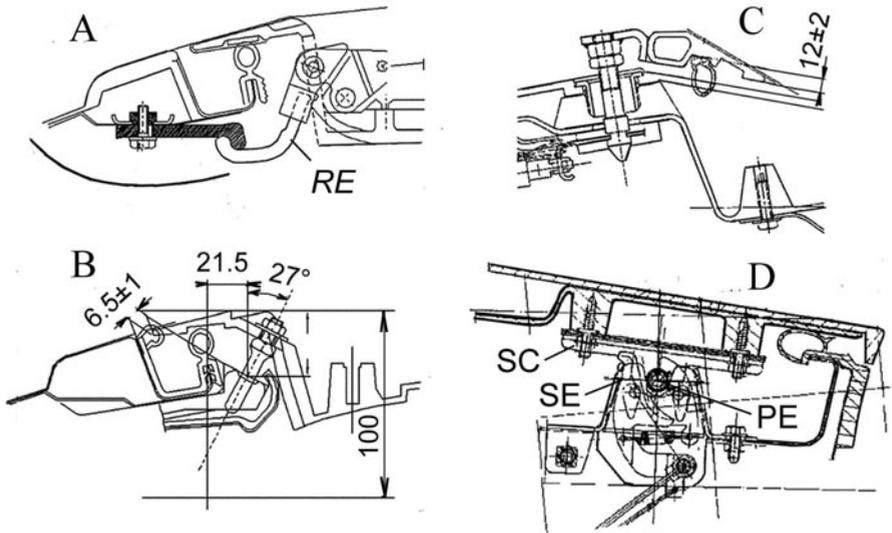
Example of locks for manual operated soft top with rear deck. A) front hook; B) front centering pin; C) rear deck to top latch; D) rear deck to body latch; RE) adjusting stroke: ± 2 mm; SE) latch; SC) striker; PE) overmoulded (e.g. by *Hytrel*[®]) anti-noise pivot.
